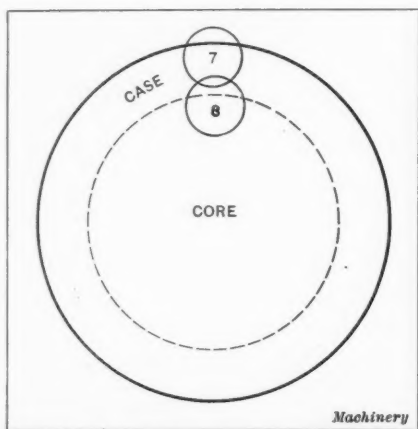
Cross-section of Carburized Piece showing Location of Portions shown in Figs. 7 and 8
